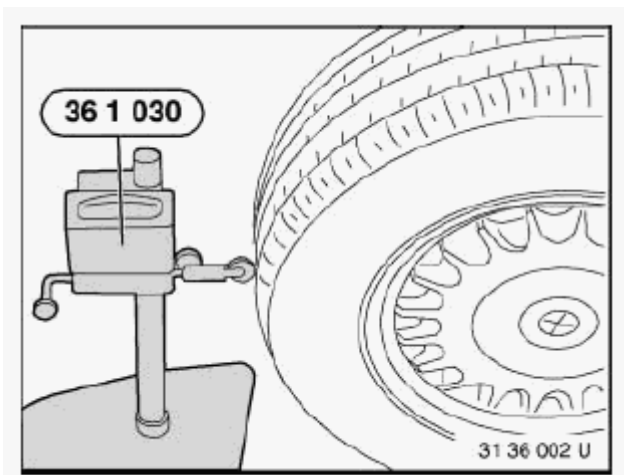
Checking Radial Runout With Special Tool (36 1 030)
